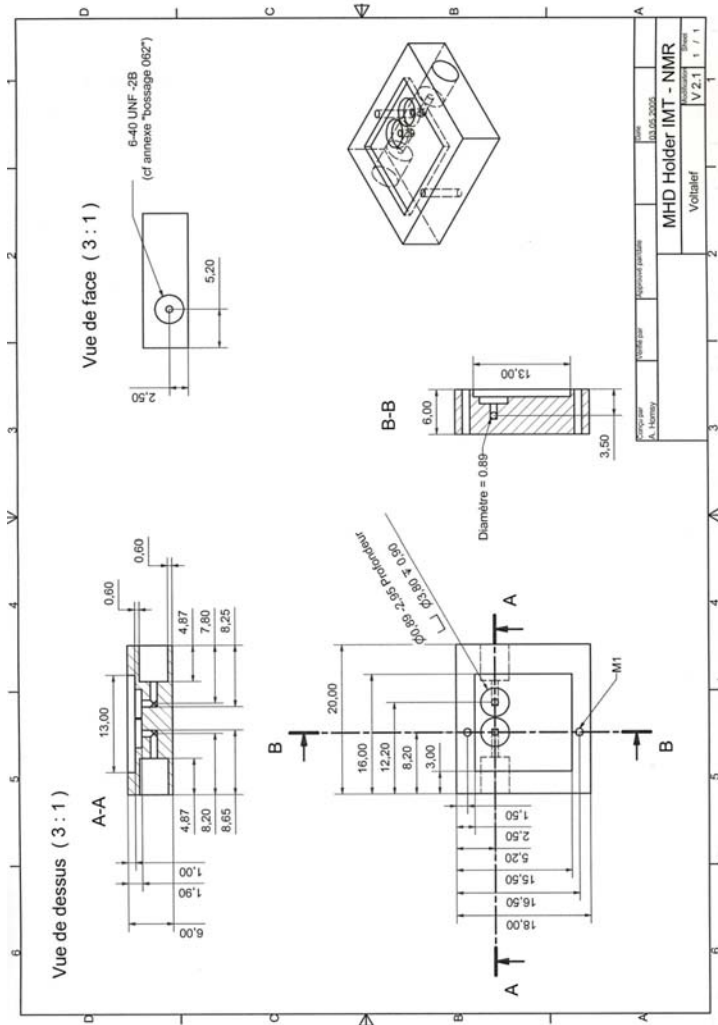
Technical drawing of the bottom part of holder with detailed dimensions and views.
